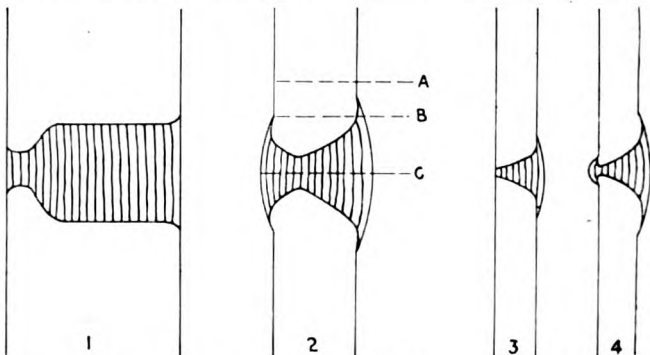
Sketch showing radiograph of a sound weld in 2-in. plate stock—Fig. 2: Sketch of weld from radiograph shown above—Fig. 3: Weld shown in illustration of test plates from $\frac{5}{8}$ -in. stock—Fig. 4: Sketch of a good gas weld
